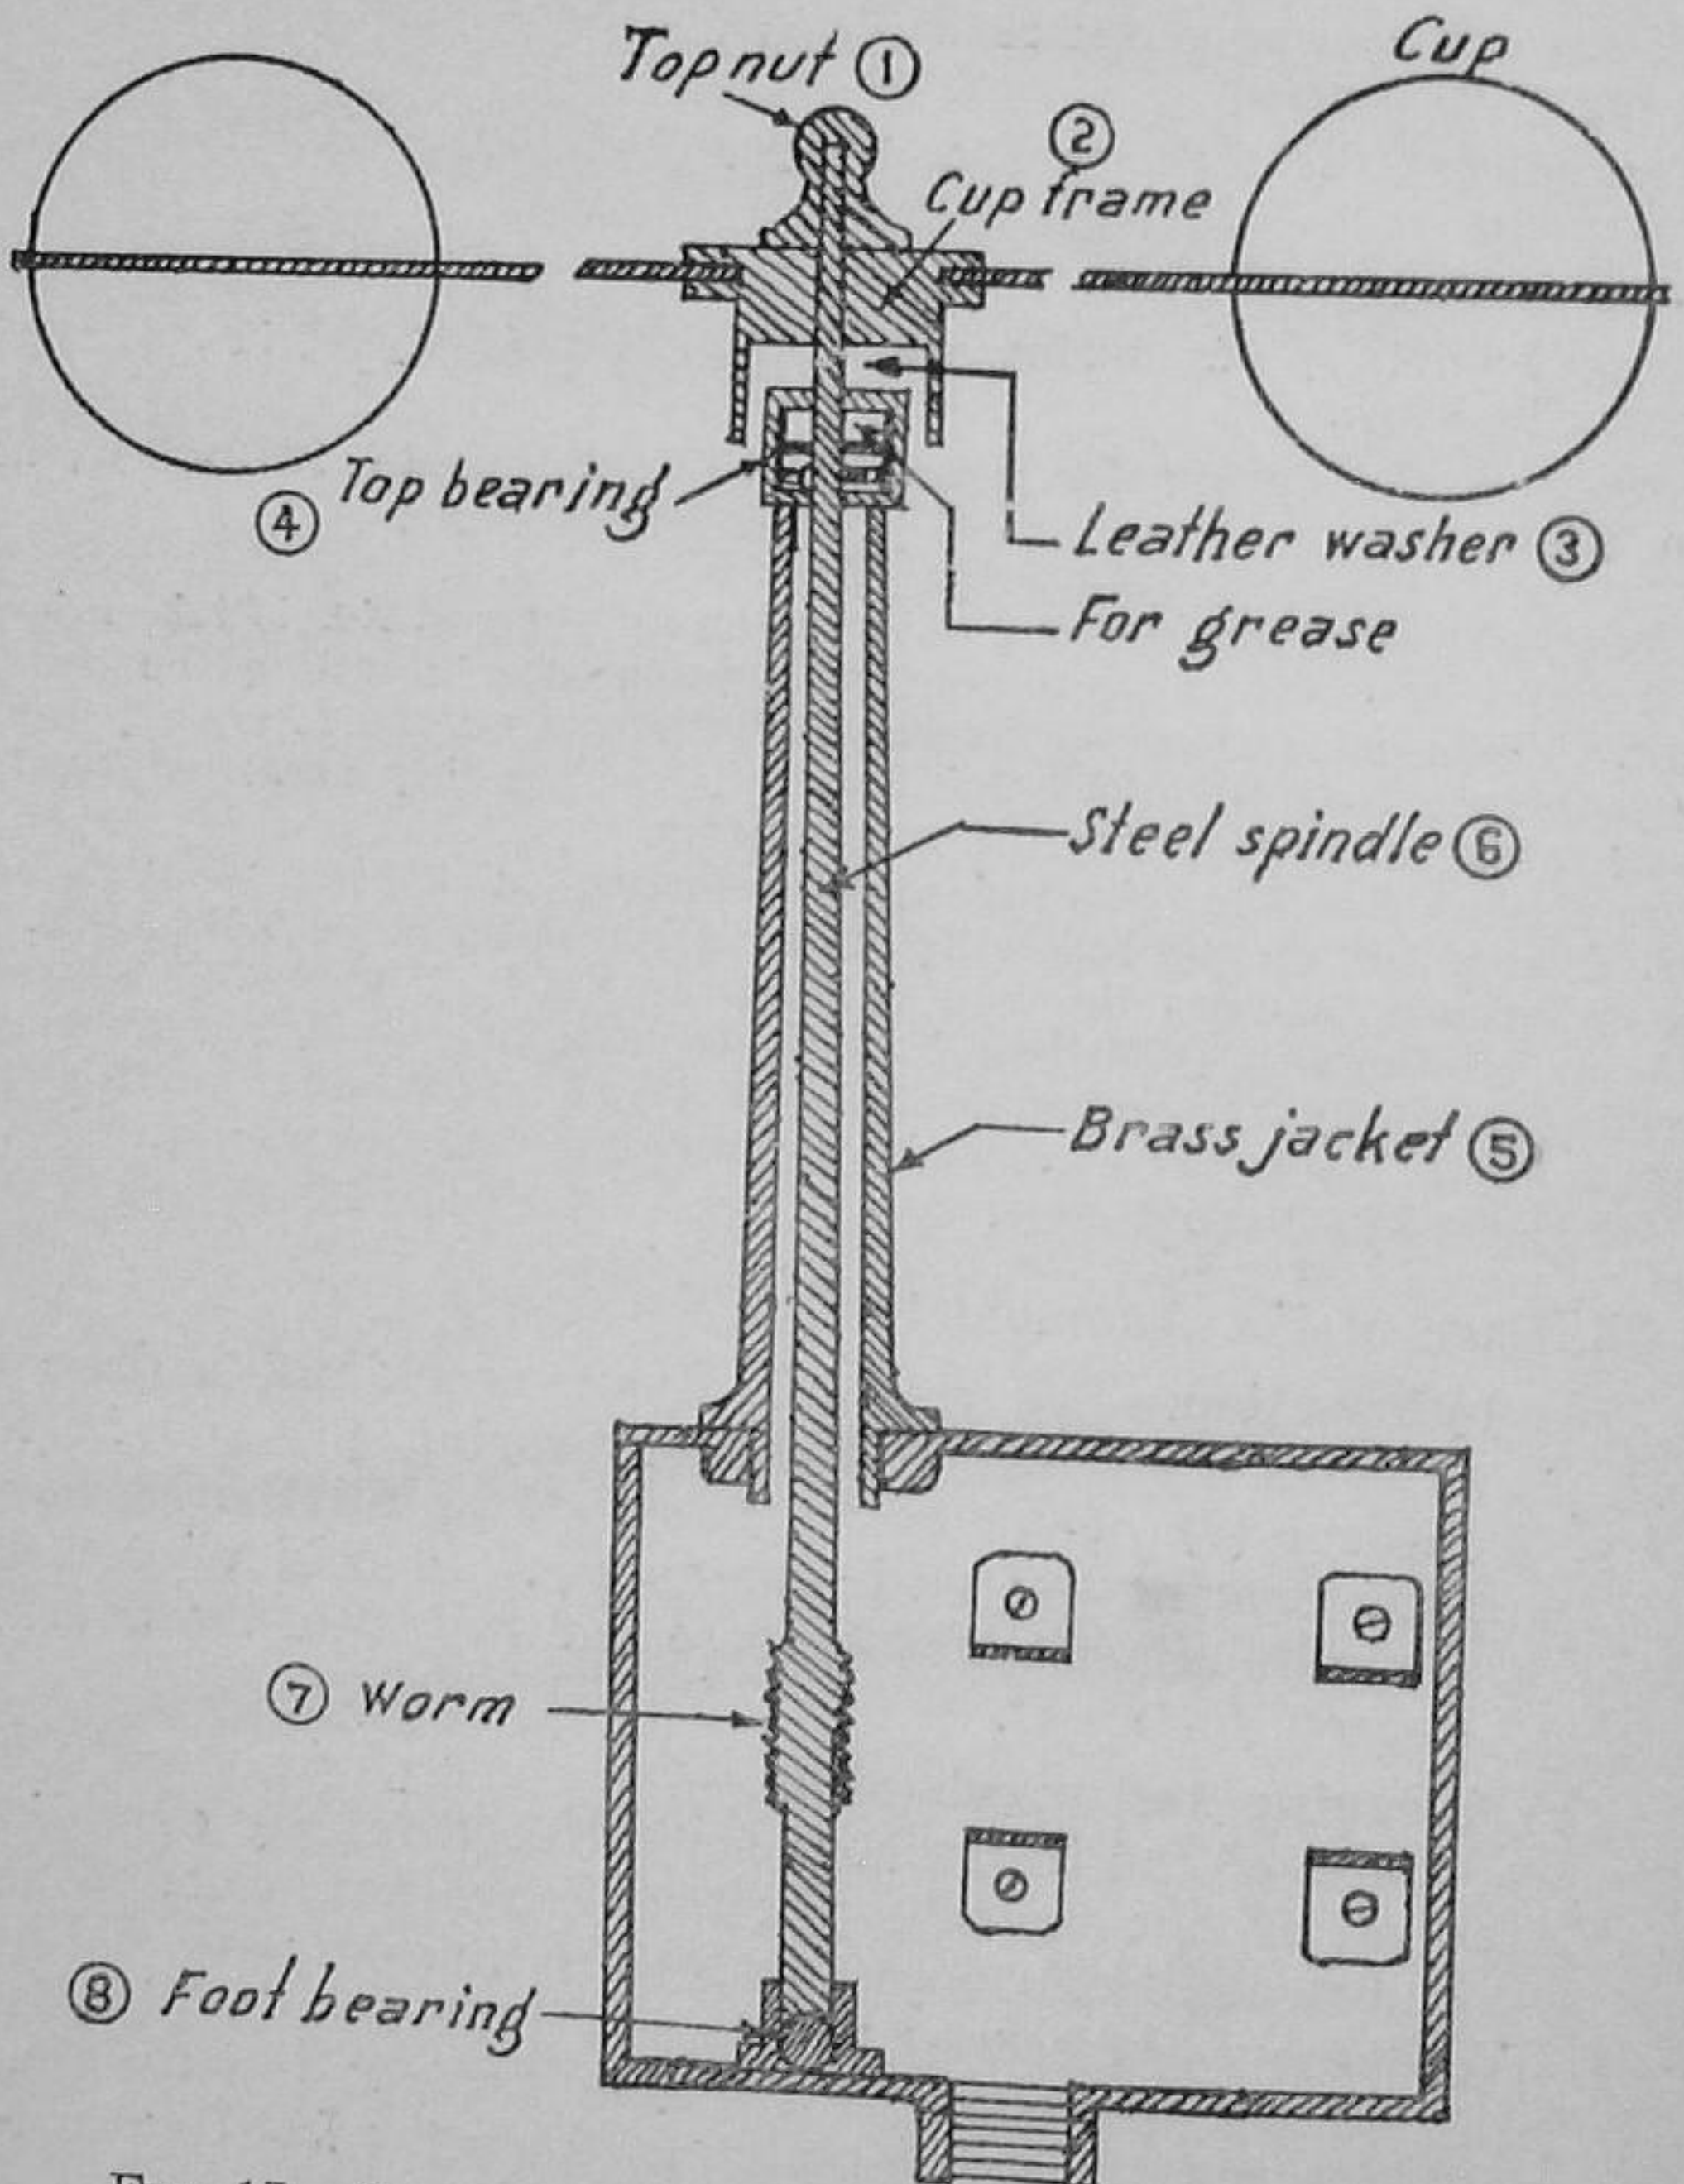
SECTIONAL VIEW OF I. M. D. ANEMOMETER.
